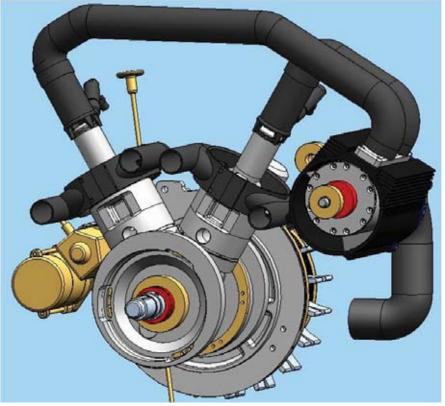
Assembly with crankshaft of novel engine design of higher efficiency
